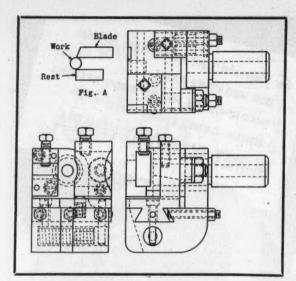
Turret Shaving Tool Holder Actuated by Special Guide Held Under Front Tool Post
